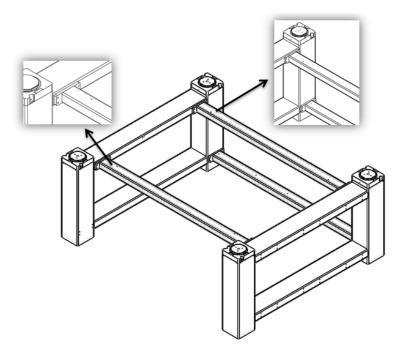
Leveling valve mounting holes located on the cross brace should be positioned inward and facing upward toward the top of the frame.
